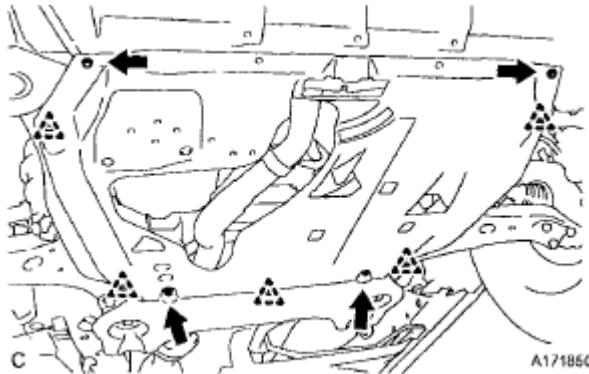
Locating Engine Under Cover Assembly, Bolt And Screw
